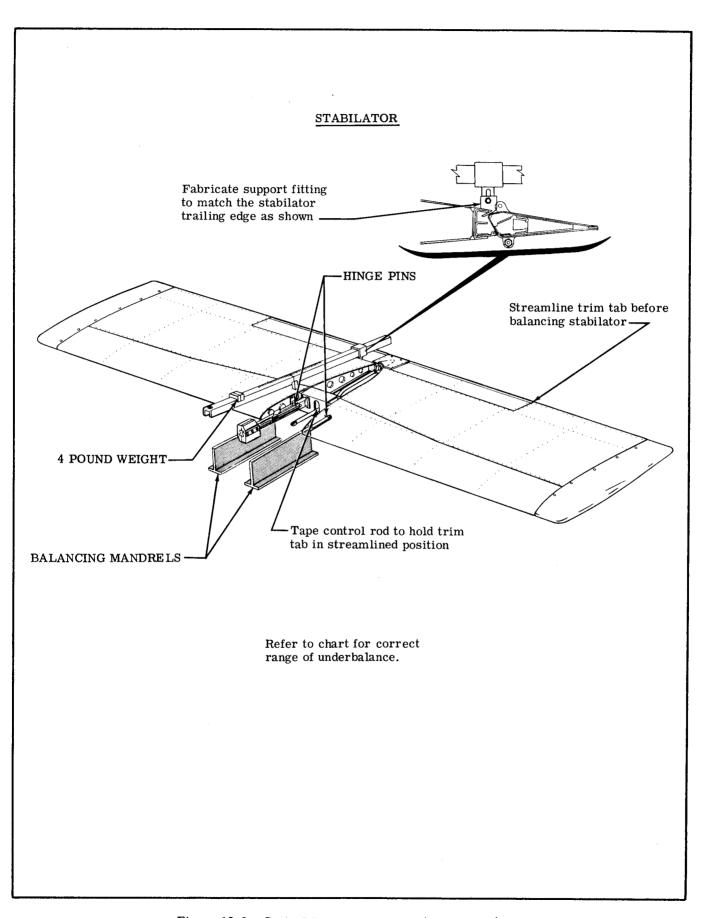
Control Surface Balancing (Sheet 4 of 4)
